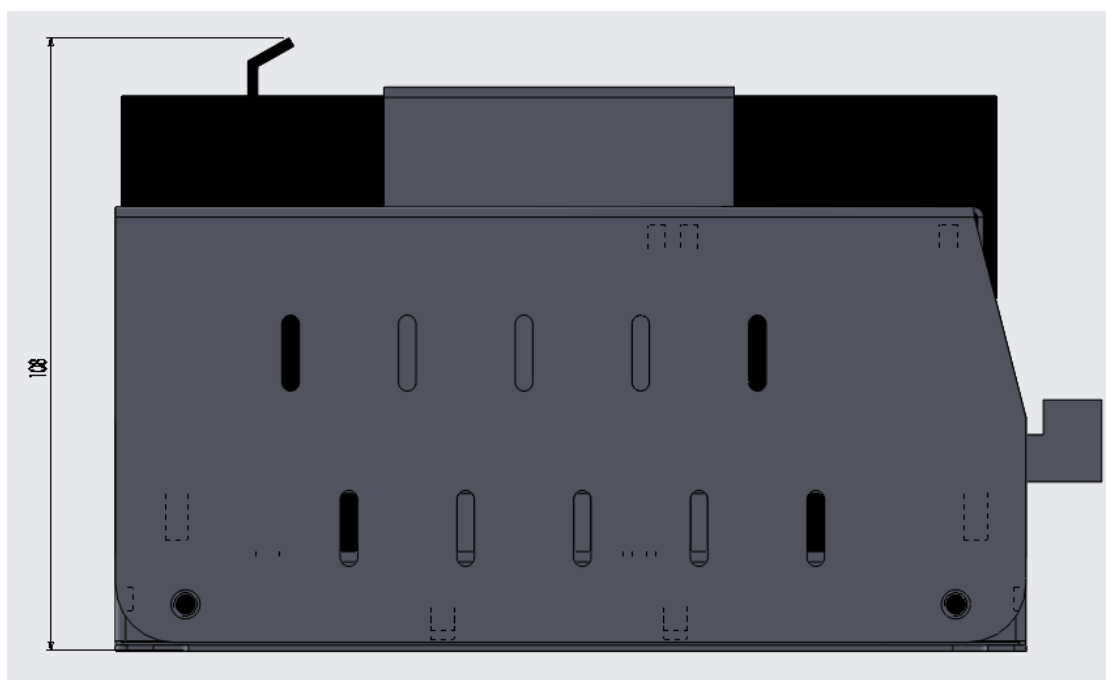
EXTERIOR DIMENSION SIDE VIEW (SJT—EPB/D 110PF)
